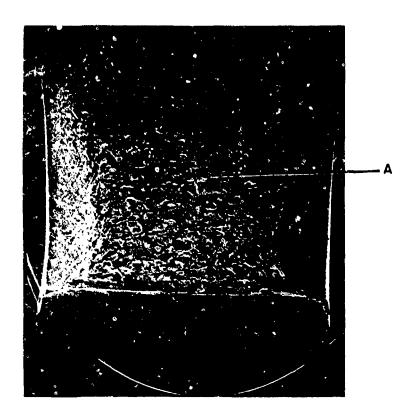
Fracture surface of an HY-130 Charpy specimen tested at room temperature, 8x.
